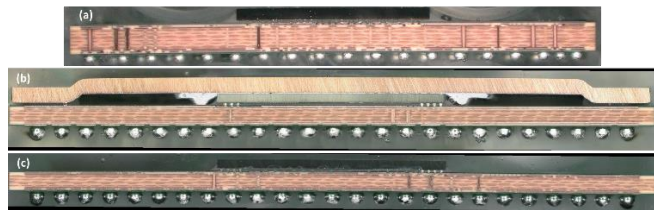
FCBGA Package cross sections: (a) 15x15mm² bare die (b) 21x21mm² lidded (c) 21x21mm² bare die
